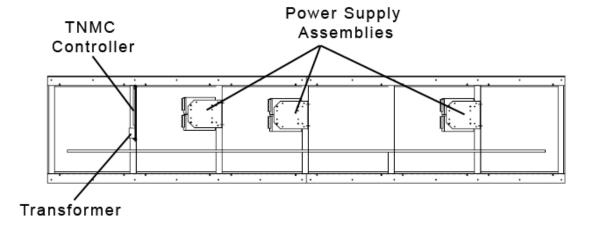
8x48-64mm TNMC Cabinet with Modules Removed
